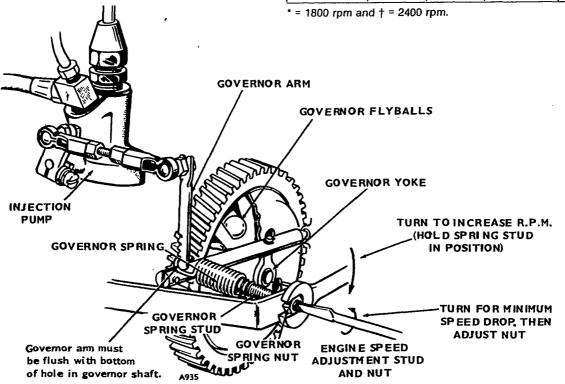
GOVERNOR ASSEMBLY (PRIOR TO SPEC R)
